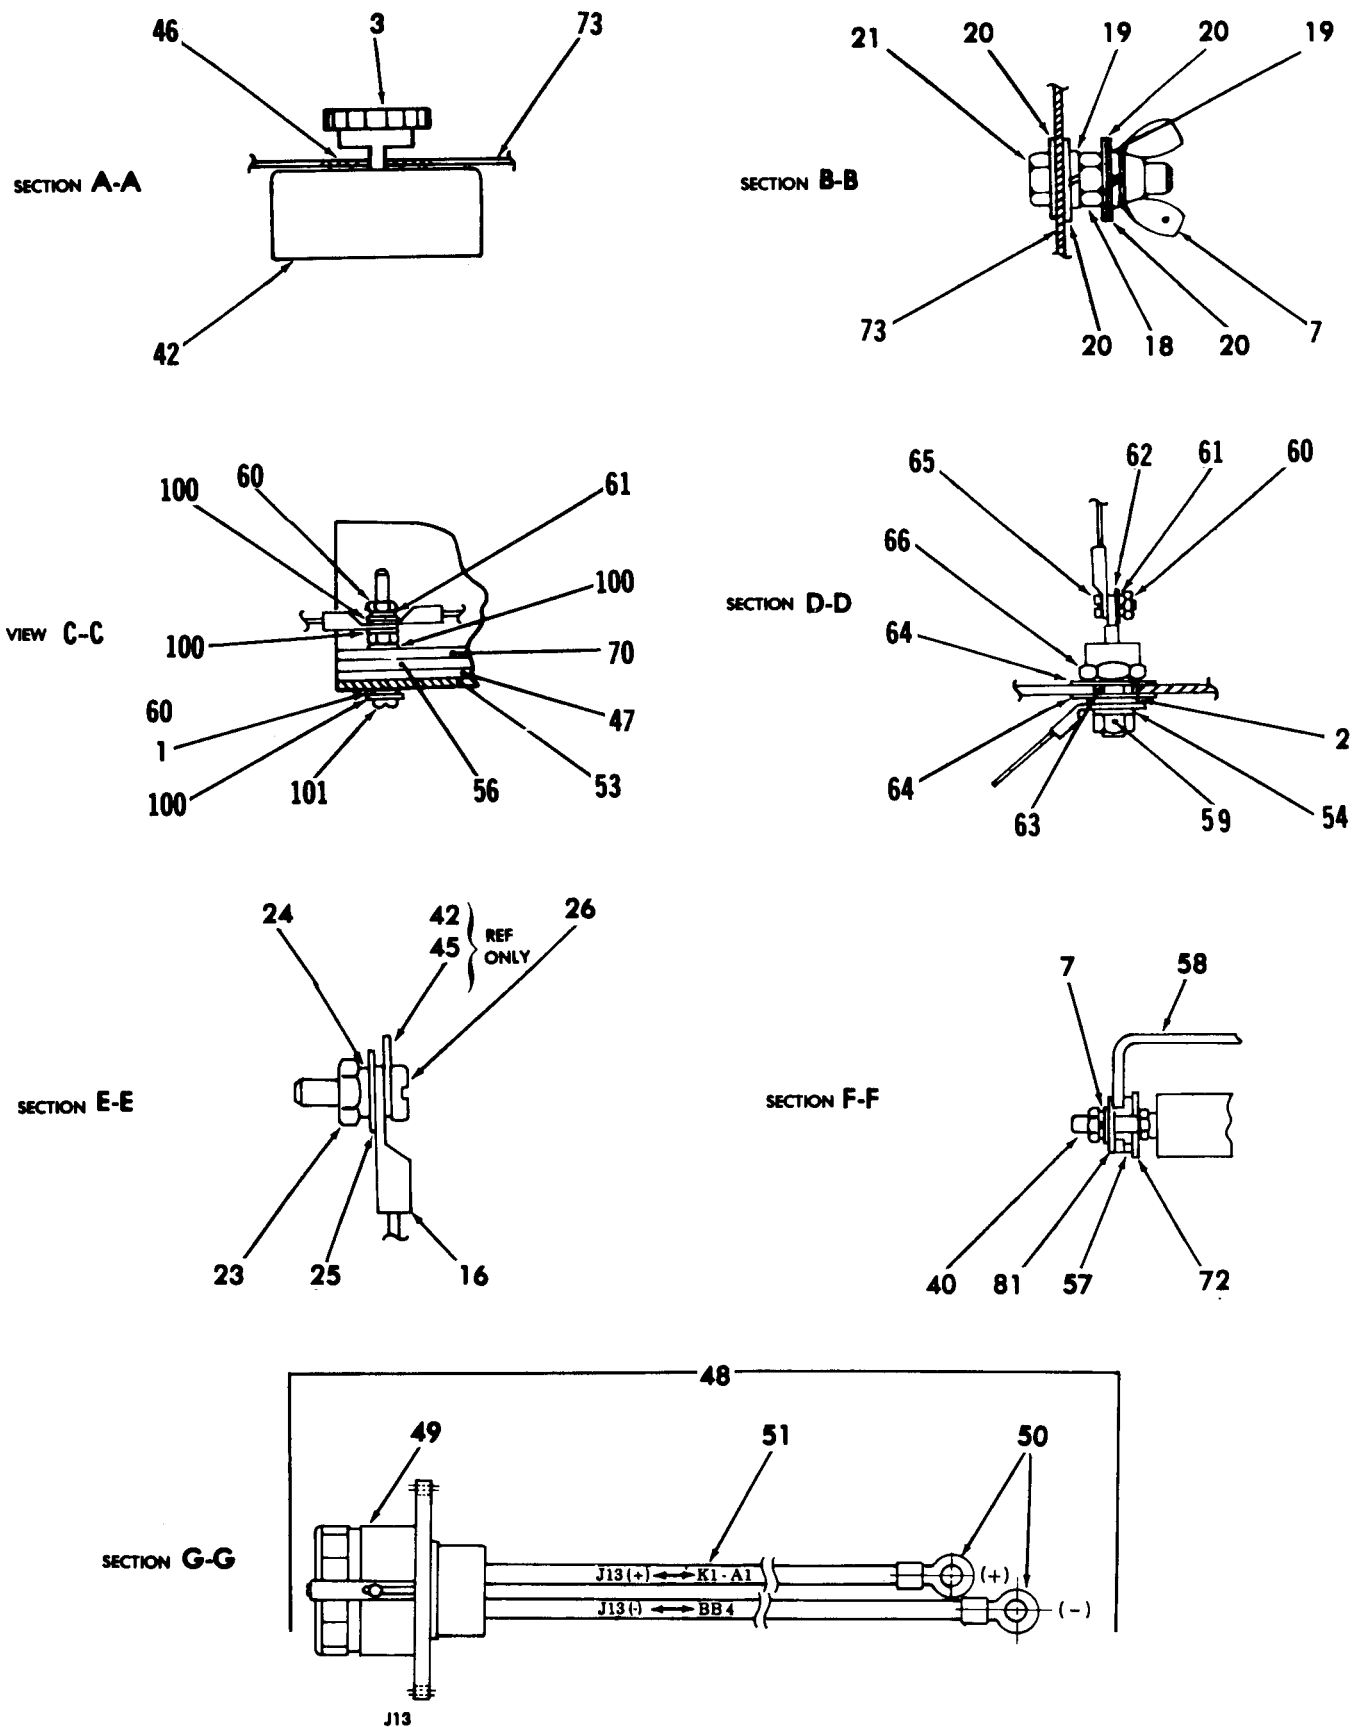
Distribution Panel Assembly (Sheet 3 of 3)
